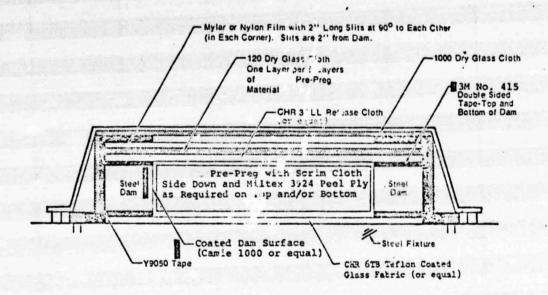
FIGURE / - LAY-UP CROSS SECTION OF LAMINATE WITHOUT EDGE MEMBERS
